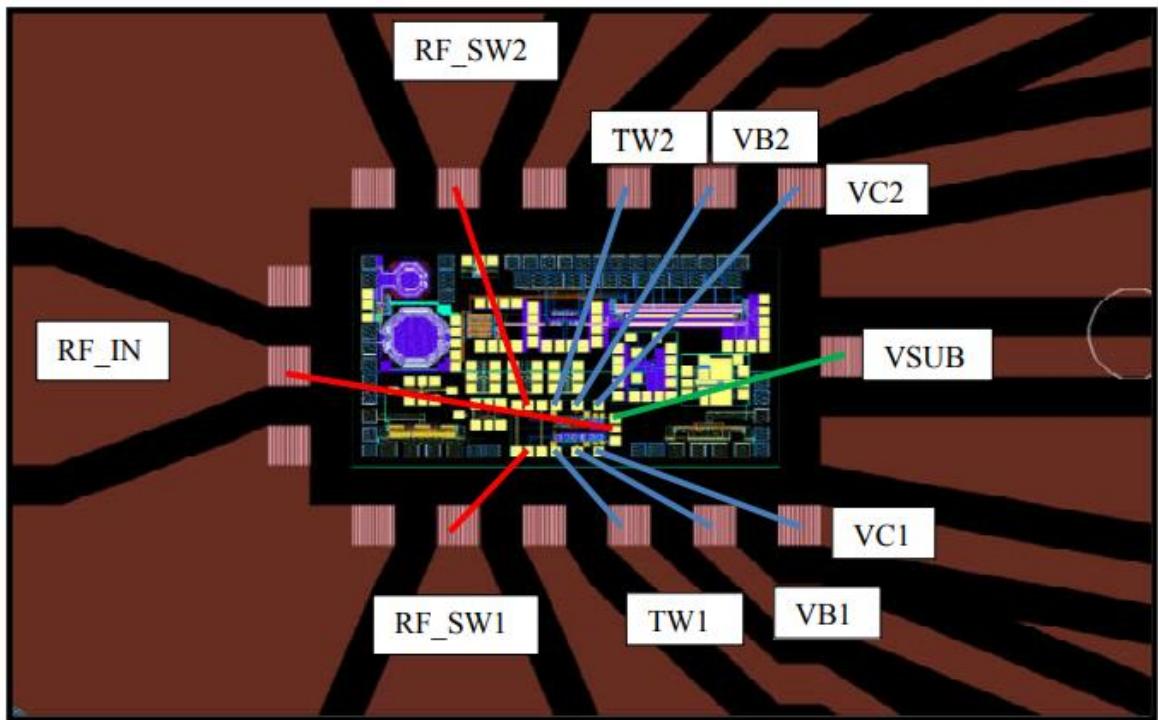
Bond-wire diagram of RF power switch in a test PCB (sample 1)
